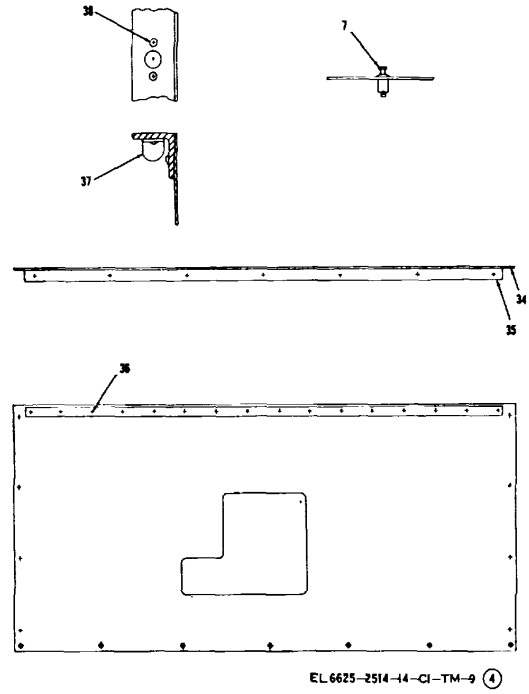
(4). U7622 chassis assembly (sheet 4 of 5).
